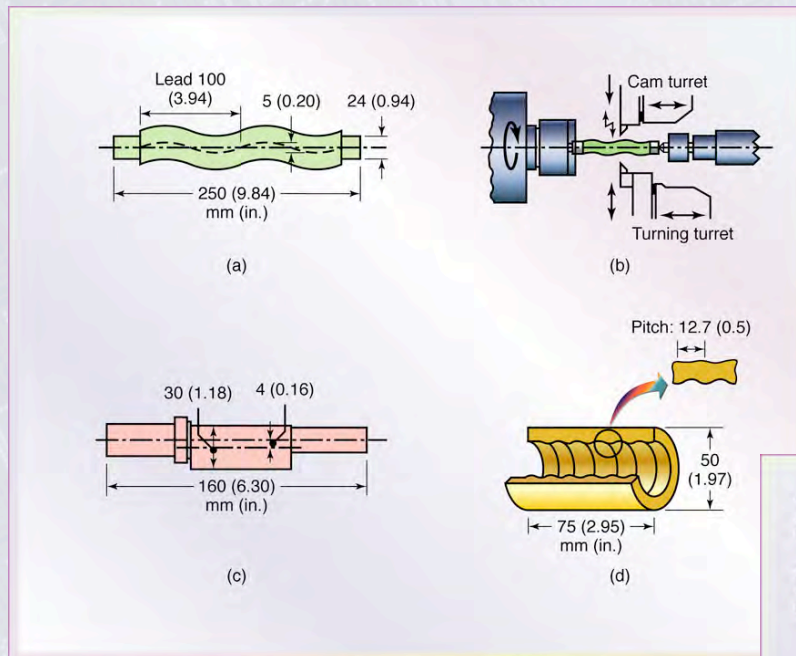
Examples of more complex shapes that can be produced on a CNC lathe.
